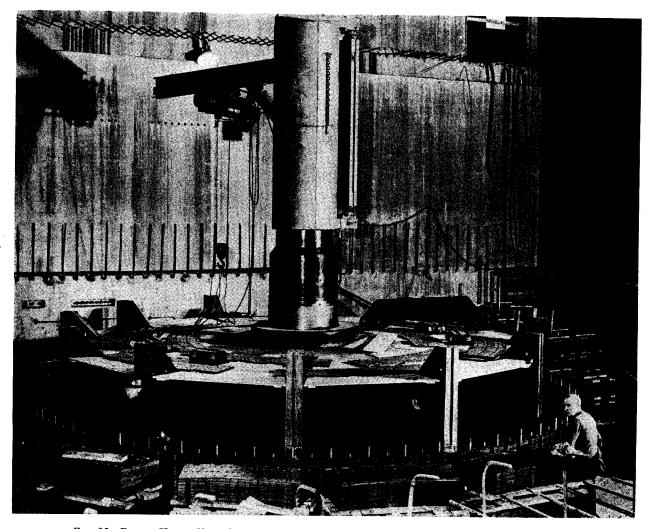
Power House View Showing Stacking of the Punchings of a Laminated Rim Rotor.
